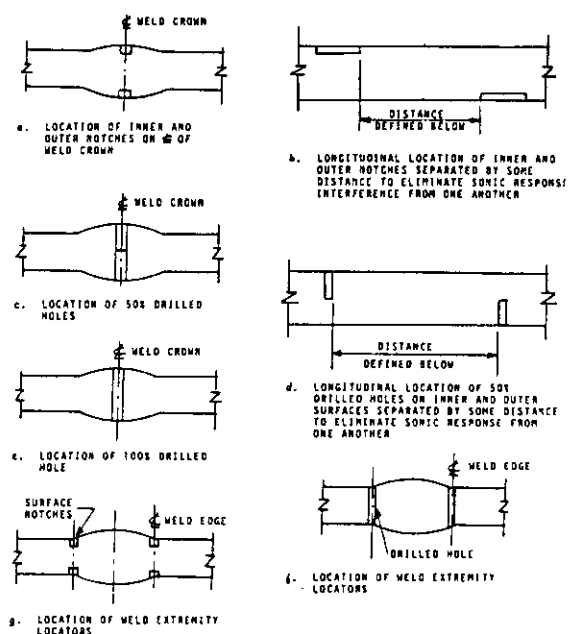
TYPICAL NOTCH LOCATIONS FOR FUSION WELDED PIPE
